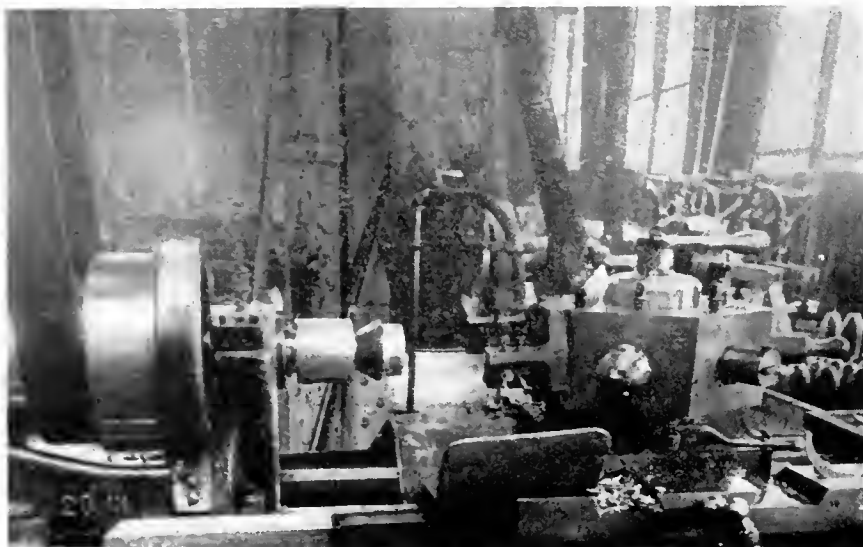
TURNING AND CUPPING SOCKETS ON AMERICAN TOOL WORKS LATHE.
